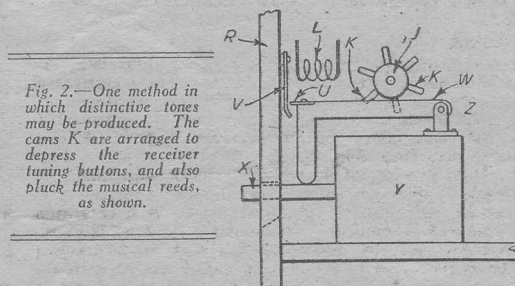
One method in which distinctive tones may be produced. The cams K are arranged to depress the receiver tuning buttons, and also pluck the musical reeds, as shown.
